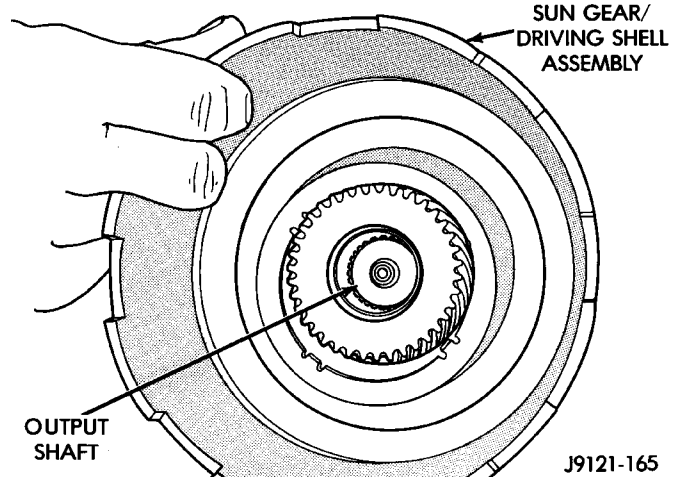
Installing Assembled Sun Gear And Driving Shell On Output Shaft
